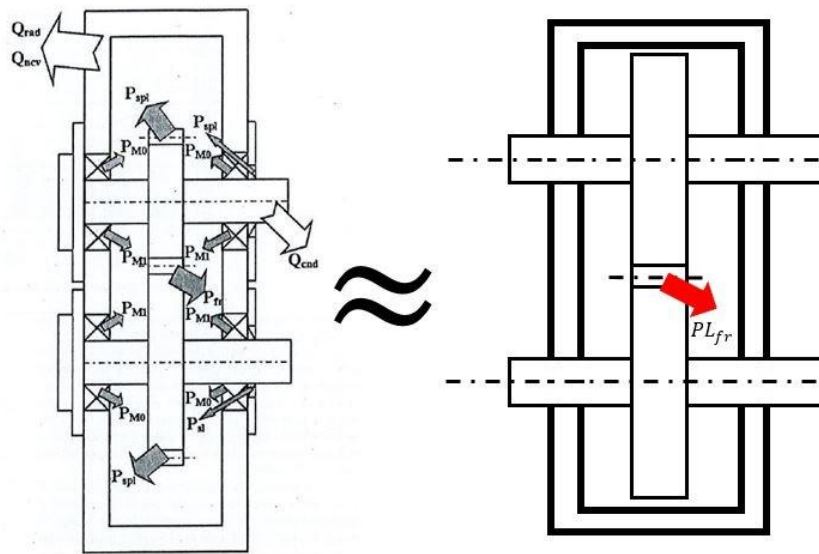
Schematic view of FZG gearbox and Lego model gearbox
